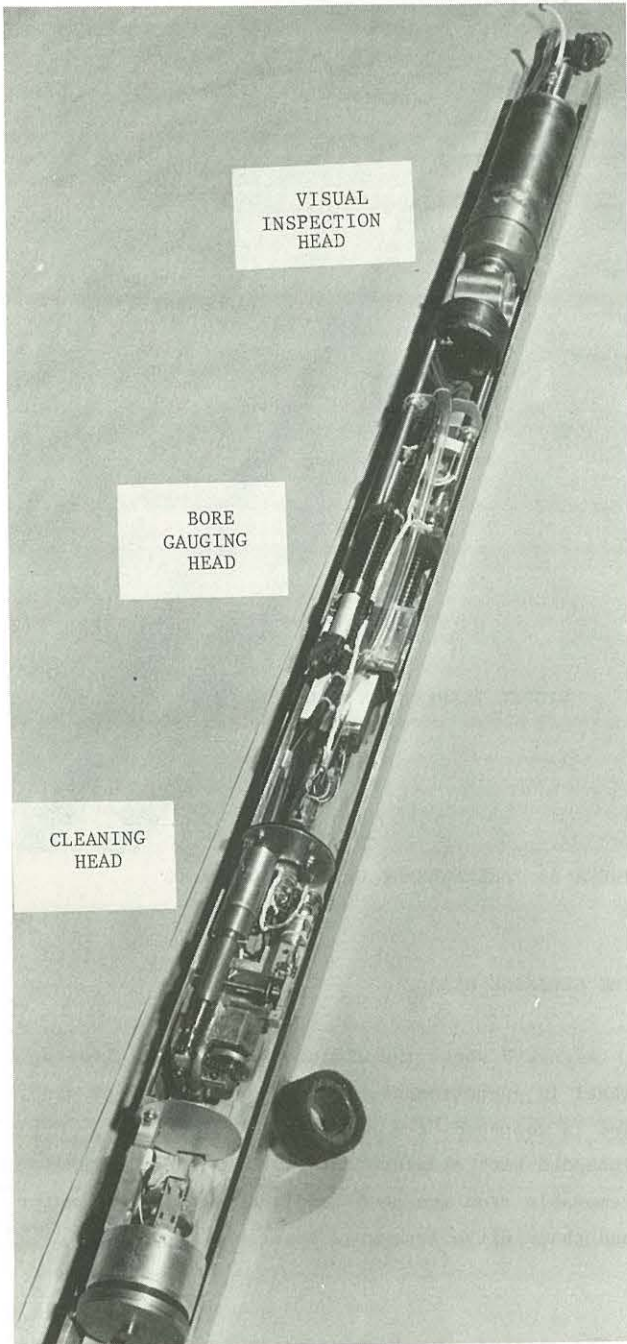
ARRANGEMENT OF THE TOOL HEADS
